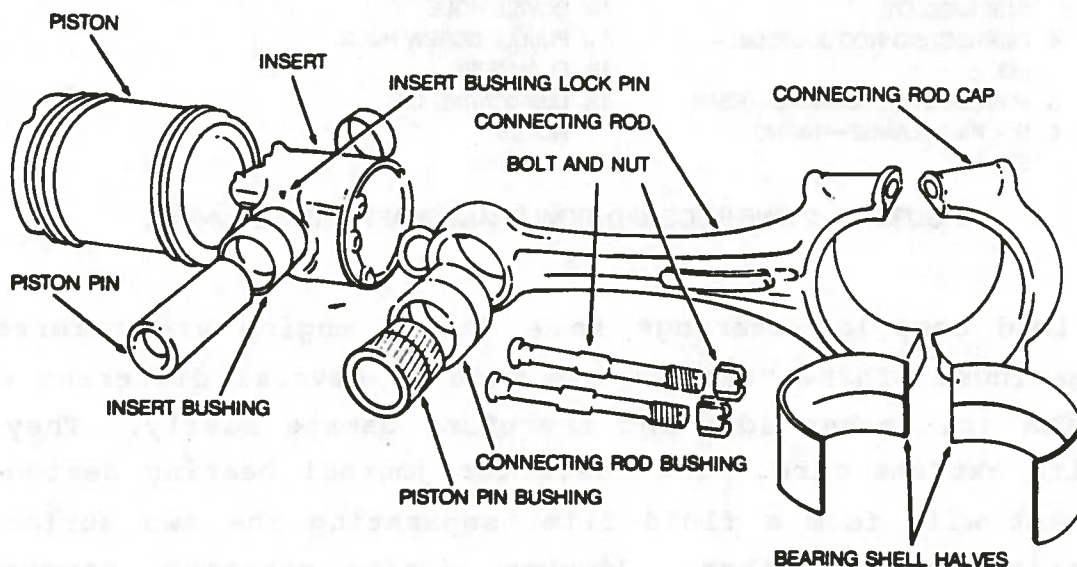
PISTON AND ROD ASSEMBLY WITH SLEEVE BUSHING TYPE BEARINGS.
